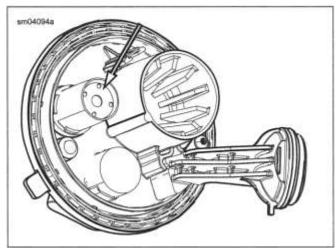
Fuel Tank Top Plate with Rollover Valve
